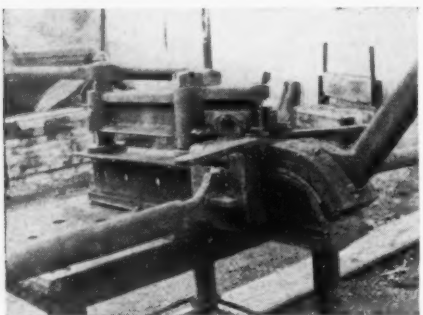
Another view of jig after iron is bent, showing side and front bending members.
